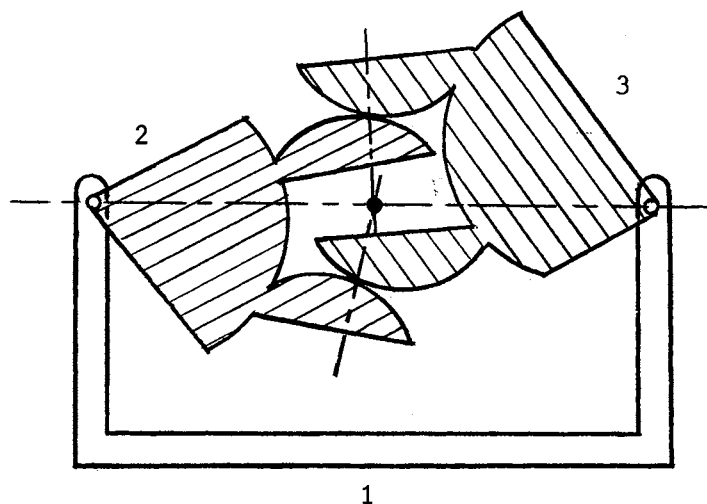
A CKC Becomes A Gear Kinematic Chain (GKC)
